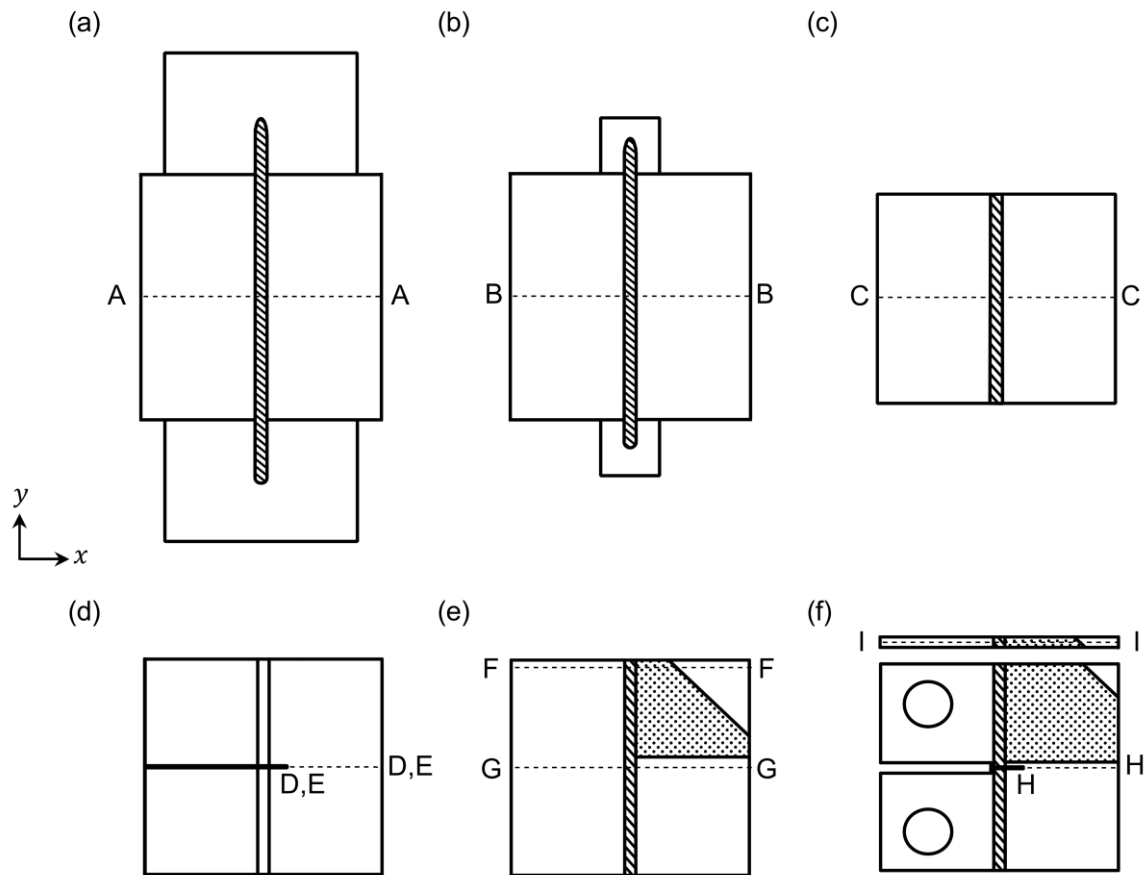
Dashed lines indicating measurement lines in samples (a) as-welded EBW1, (b) as-welded EBW3, EBW4 and EBW5, (c) EBW3, EBW4 and EBW5 C(T) blank, (d) EBW3 and EBW5 C(T) specimen, (e) EB1 C(T) blank, (f) EB2 C(T) specimen and EB2 reference sample, all measurement lines were at mid-thickness except line EE which was at quarter thickness. The EB and MMA welds are shown by striped and dotted patterns respectively.
